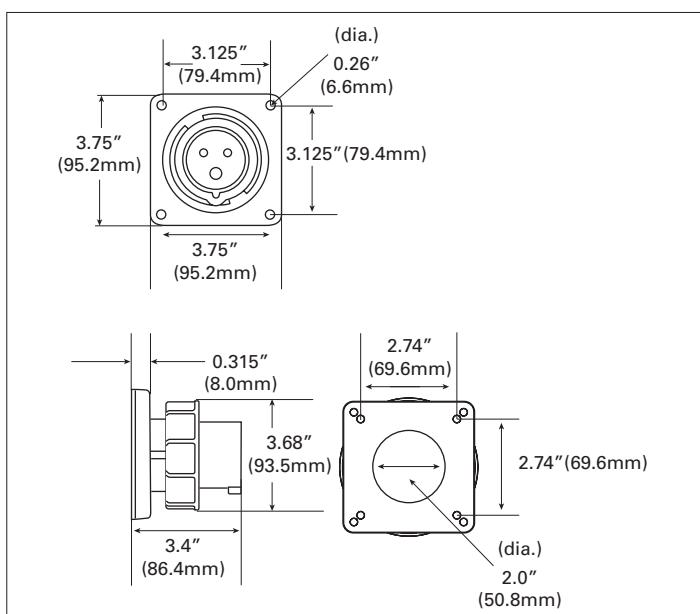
30A & 32A 2-P, 3-W & 3-P, 4, Front, Side & Back View Inlets
